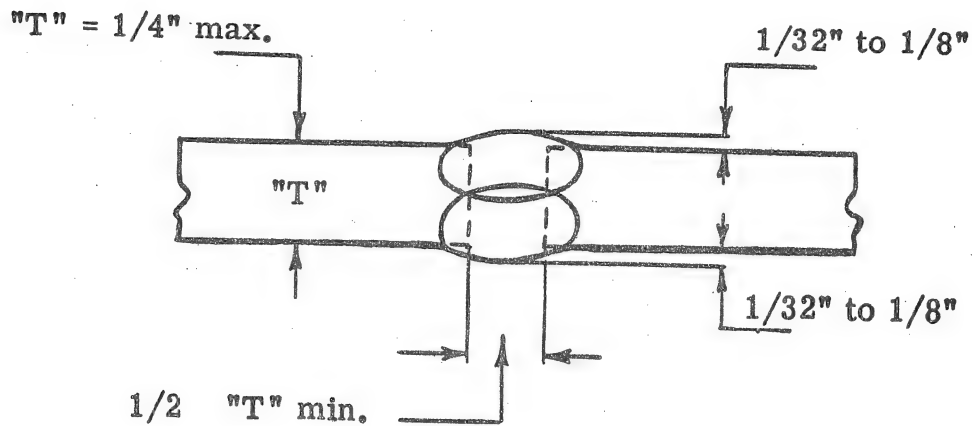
Square Groove Open Butt Joint welded with bead weld from both sides.
